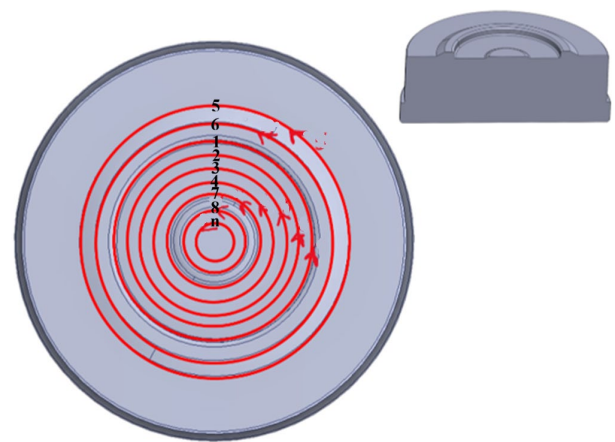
The sequence of making beads in the first layer of the overlay for a tool with a cutout of complex geometry
